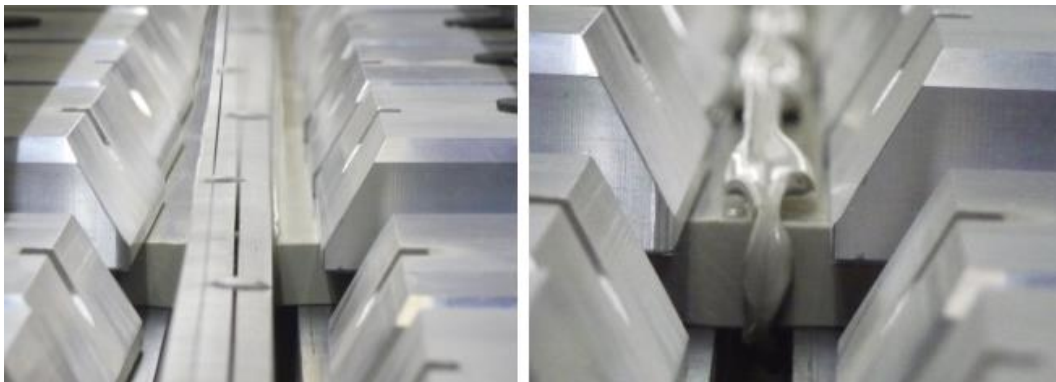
Bead is formed by pressing the Sheets against the Heated Tool (Left). The Sheets are pressed together and joined (Right) (Picture by Author)
